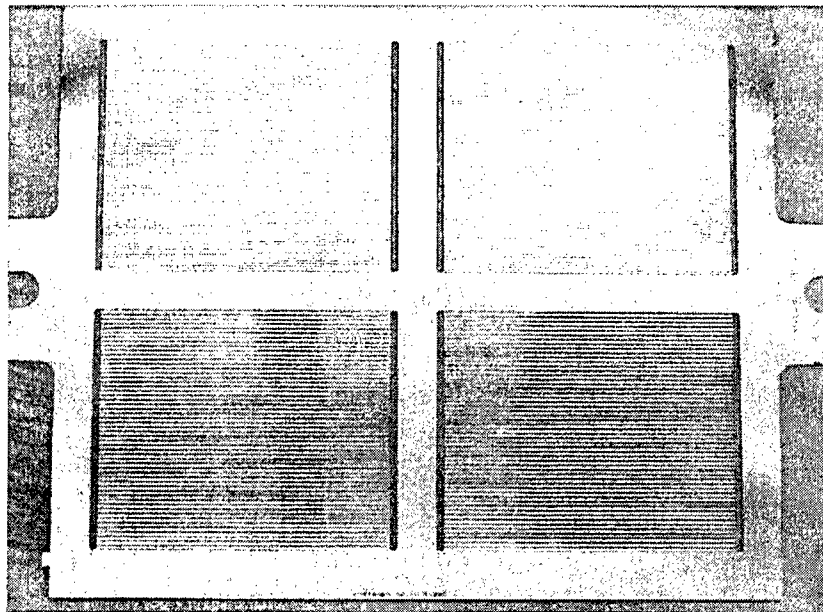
Typical Foil Used in Fabrication of Parallel μ Heat Exchange Specimens
